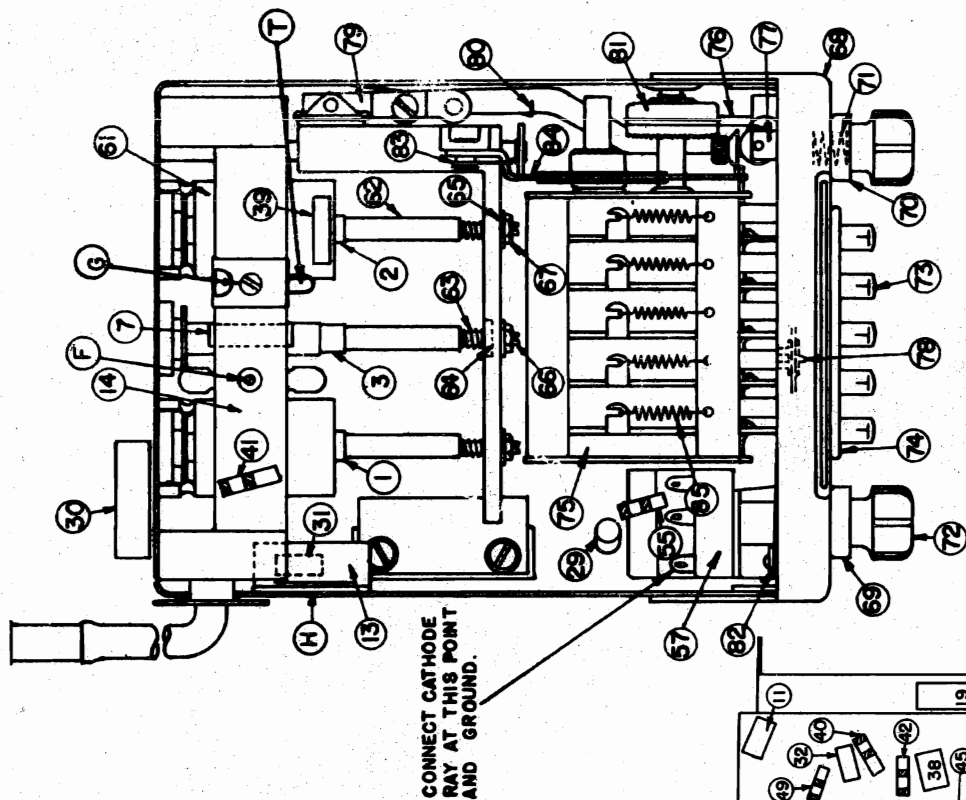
PARTS LAYOUT--TUNER ASSEMBLY
